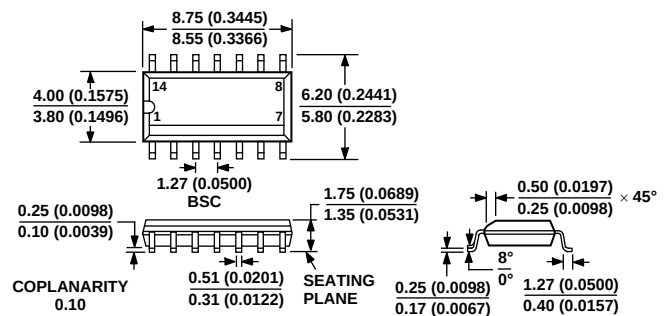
14-Lead Standard Small Outline Package [SOIC]
